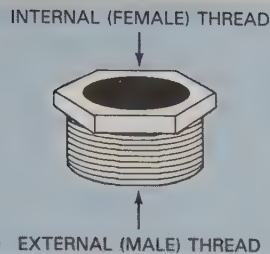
A reducing bushing threads into a female opening (such as one end of an elbow) to allow a smaller pipe to be connected easily.
